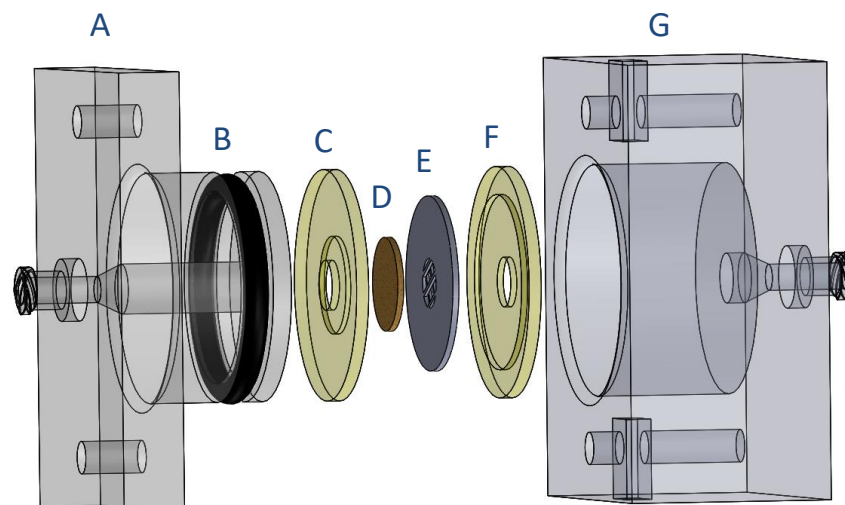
Exploded view of the permeability chamber assembly for tests on soft samples: A) upper part, B) o ring, C) sample gasket, D) soft sample, E) grid, F) grid gasket, G) bottom part.
